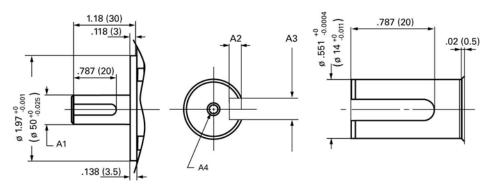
β 2/3000, β 3/3000, β 6/2000, and α C12/2000 motors with brake, side view
